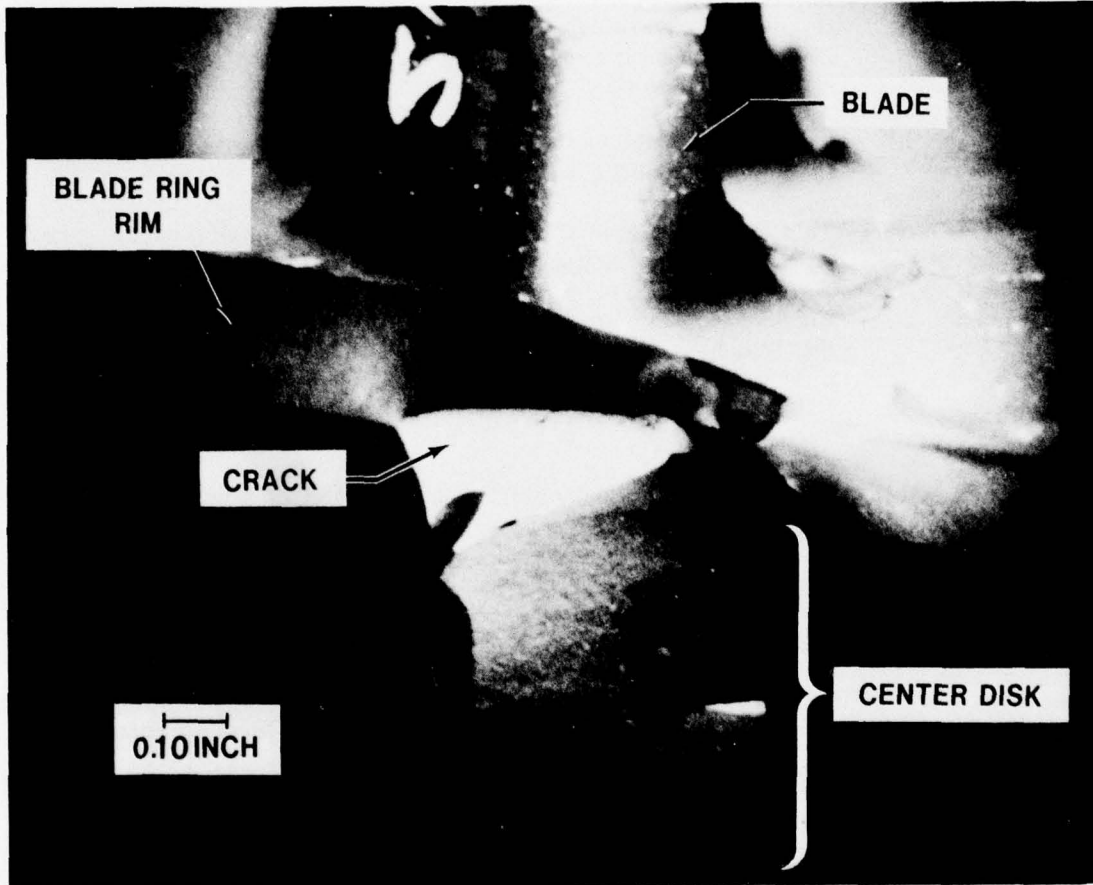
Rotor Blade Ring with Rim Crack Defect
